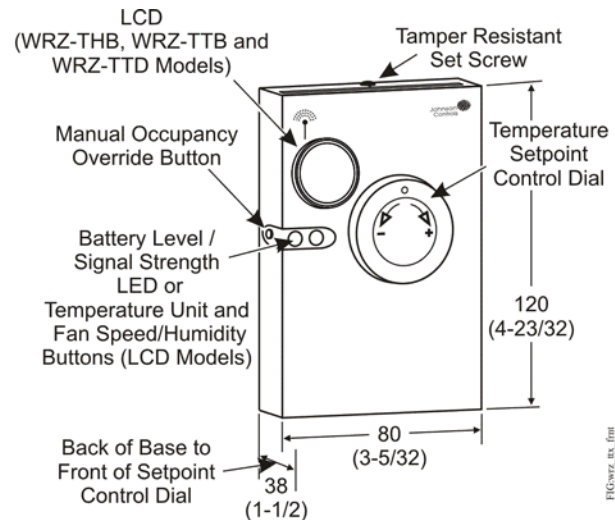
WRZ Series Sensor, Physical Features and Dimensions, mm (in.)
